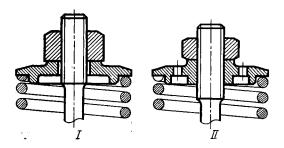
Adjusting spring pressure. Nut is locked by spring pressure (I) or by lock nut (II)
